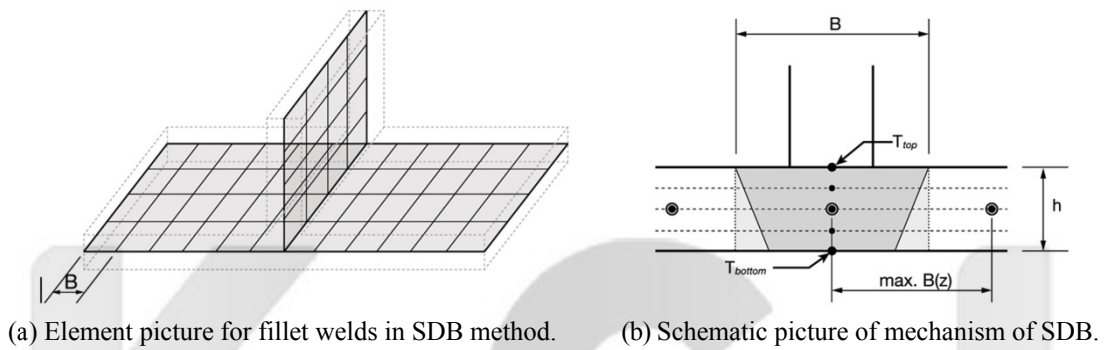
Schematic picture of SDB method in fillet welds.
